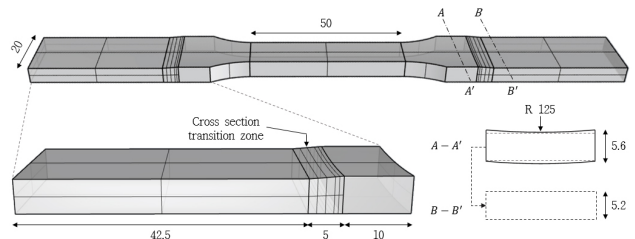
Schematic Diagram of Tensile Specimen and the Grip Geometry of FR Grip Part Flattened with Reduced Cross Section (Unit: mm)
